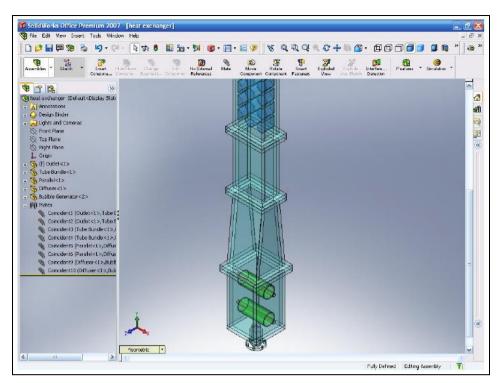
Assembly drawing of test section 38 mm in diameter in-line bundle, bubble generator, convergent section and settling length
